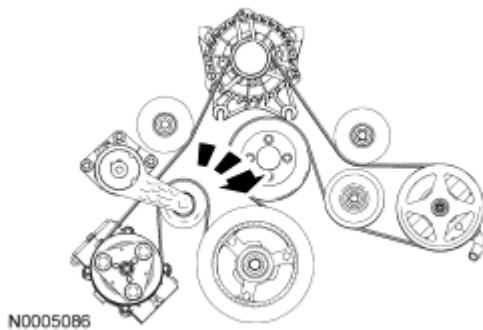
Rotating Accessory Drive Belt Tensioner Clockwise
